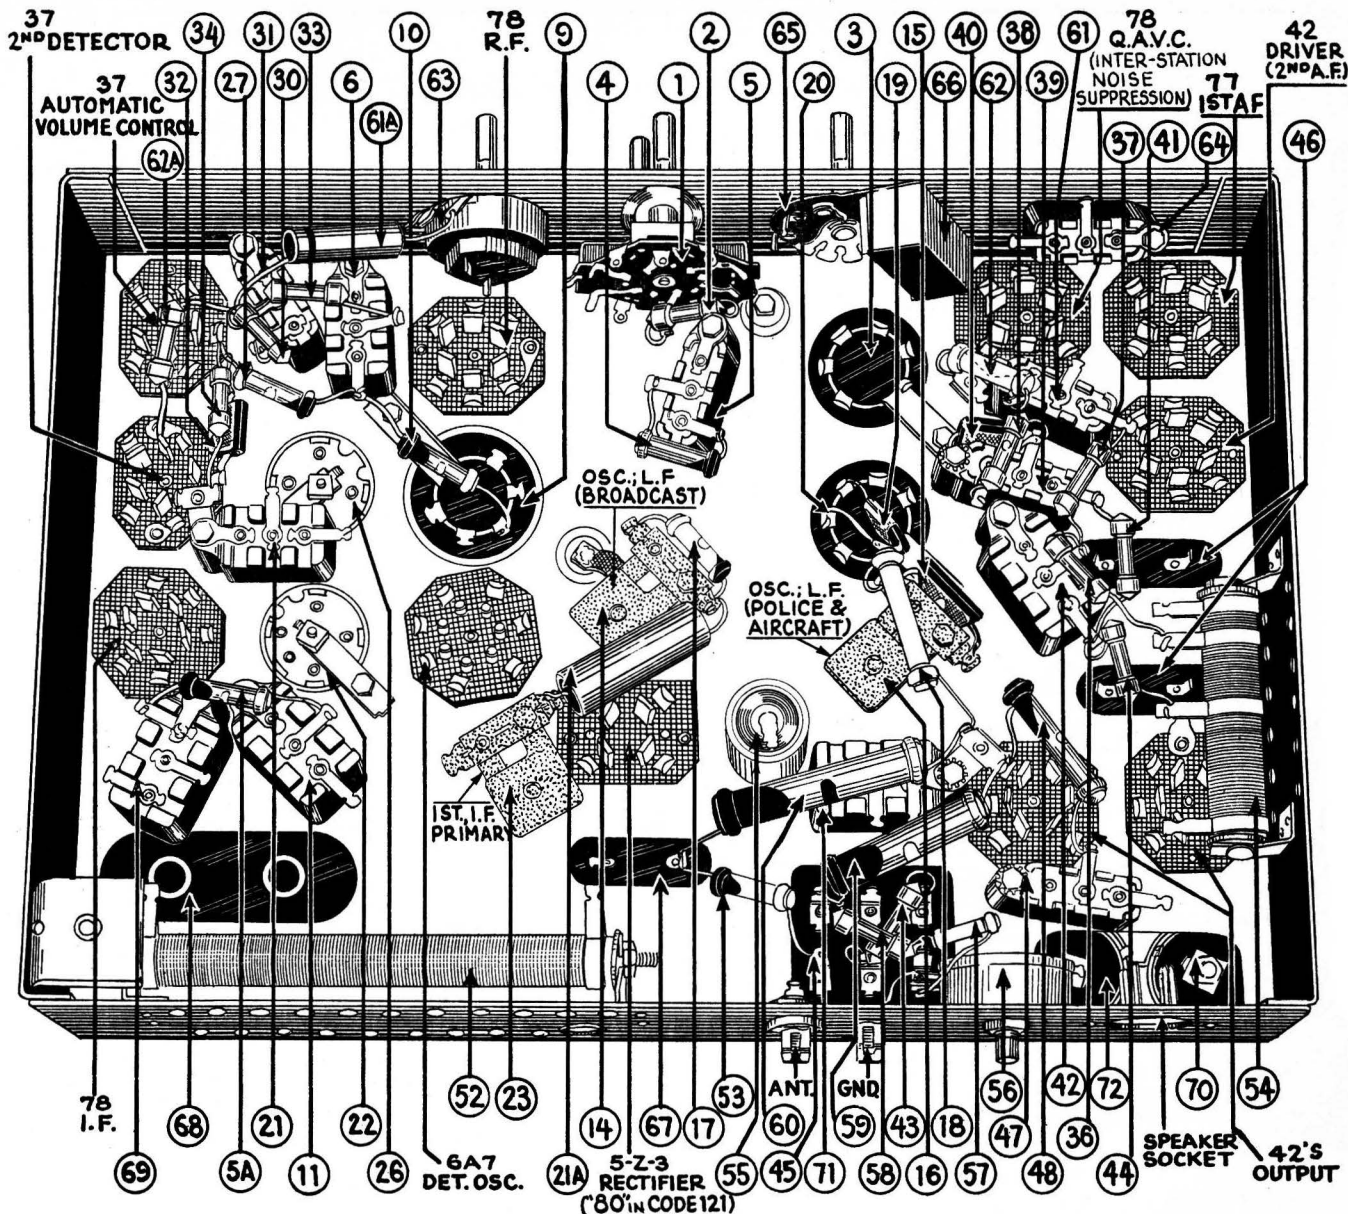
Bottom View of Chassis, showing Parts, and Position of Compensating Condensers Located Underneath Chassis
